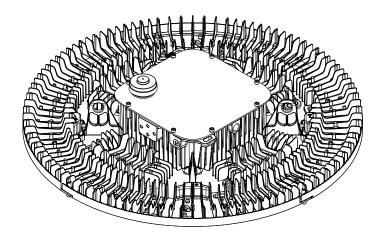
MOUNTING OPTIONS - NO MOUNT
